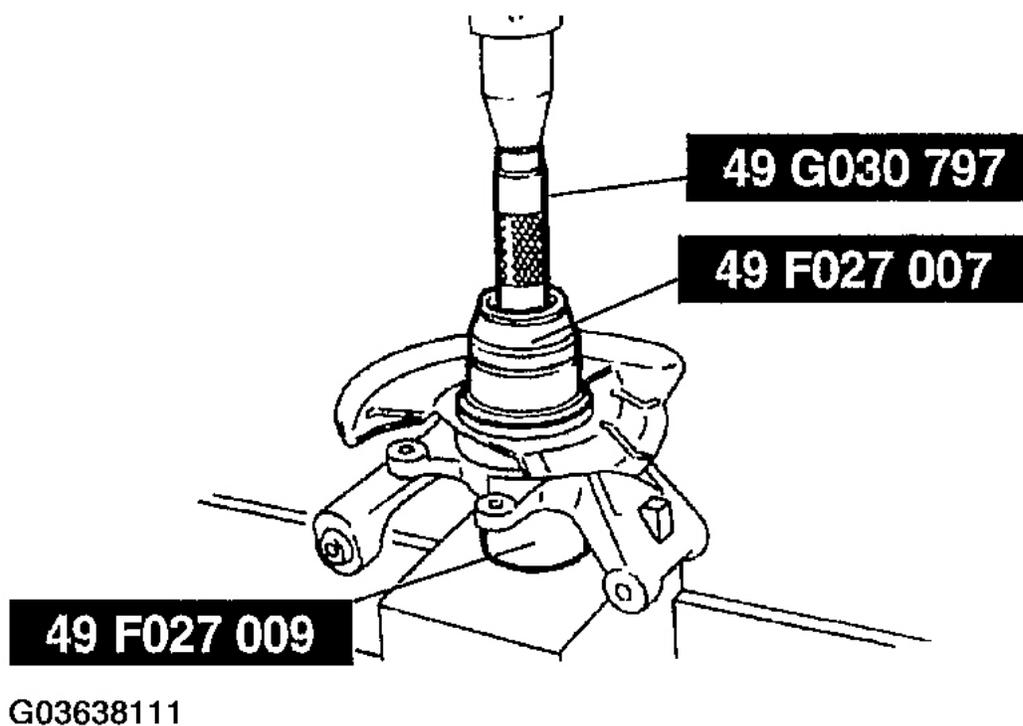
Pressing New Wheel Bearing Into Knuckle Using SSTs
